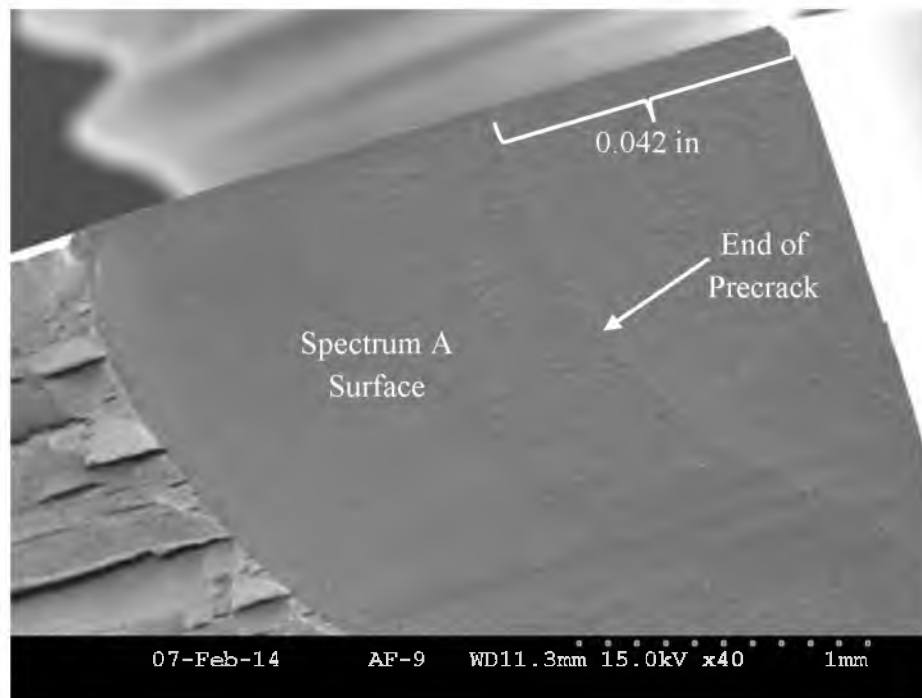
Wide View of GT270-9 Fracture Surface
